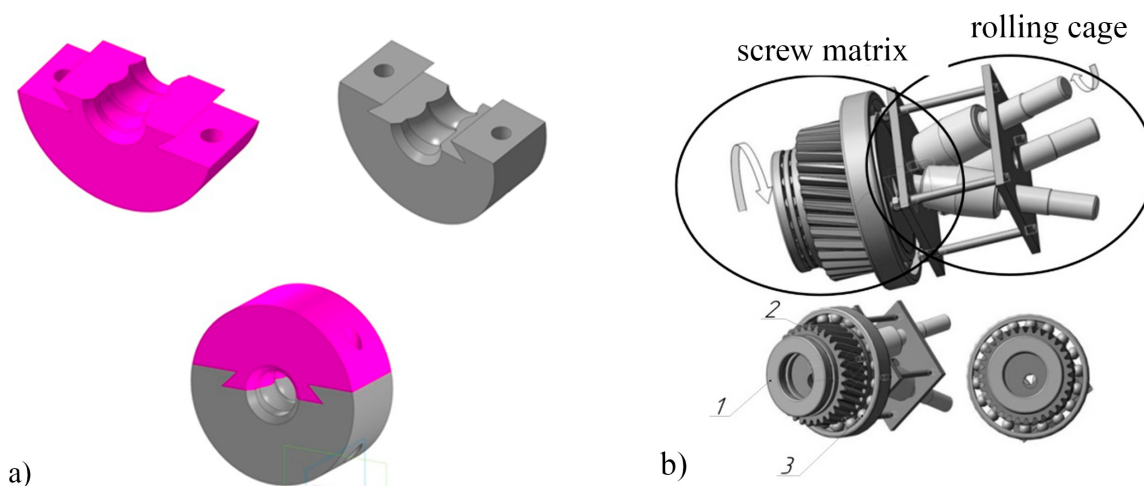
Diagram of the implementation of a new combined process for producing screw fittings: 1 - thrust bearing, 2 - gear wheel, 3 - radial bearing.
